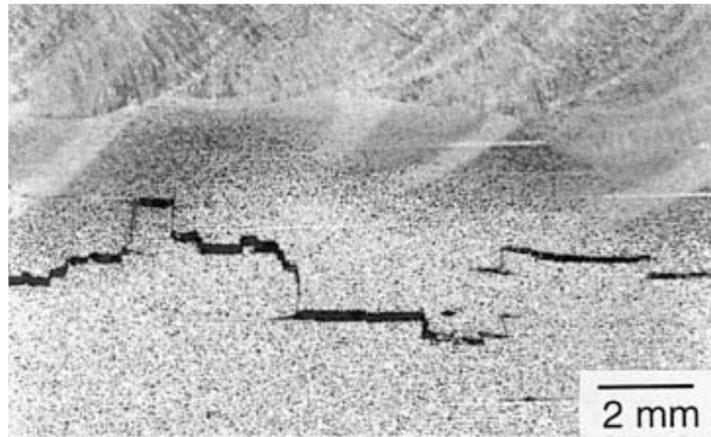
Lamellar tearing near a C-Mn steel weld [33].
